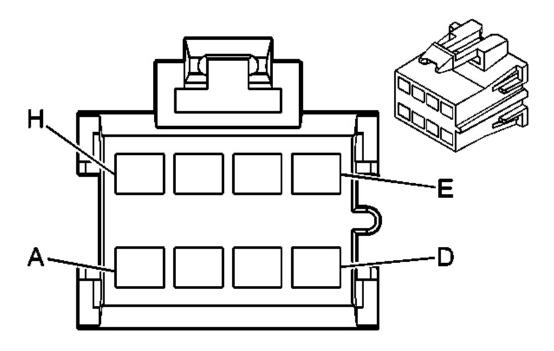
Driver Seat Adjuster Switch (AG1) Connector End Views Courtesy of GENERAL MOTORS CORP.
